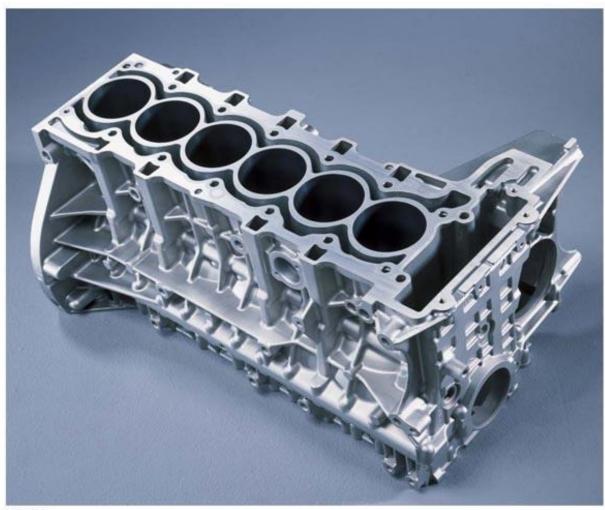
Identifying Engine Block Courtesy of BMW OF NORTH AMERICA, INC.
